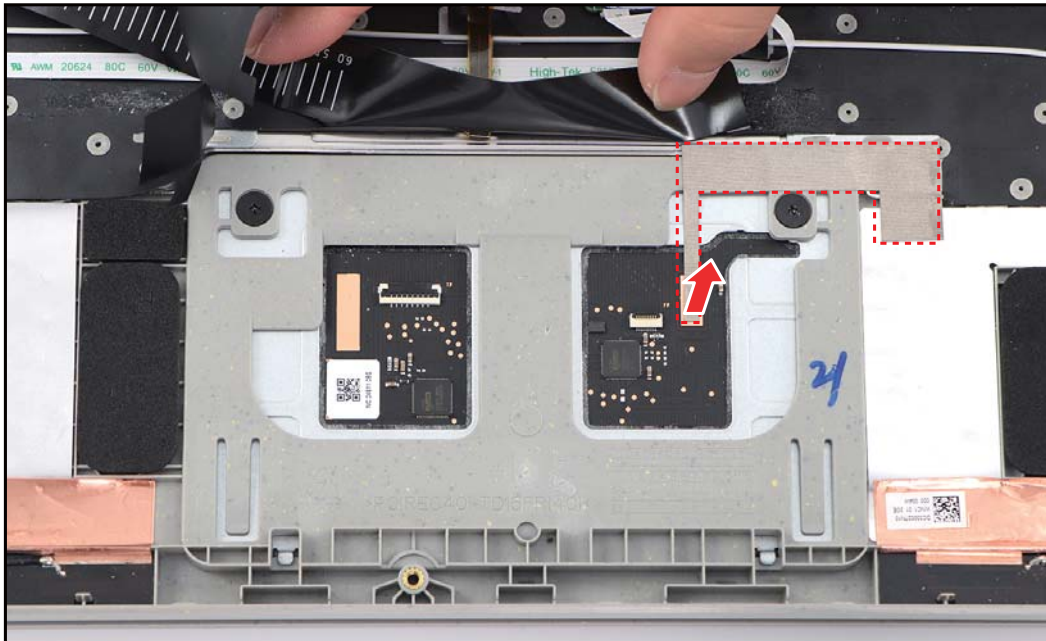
Disconnecting the Hall Board Sensor FFC
